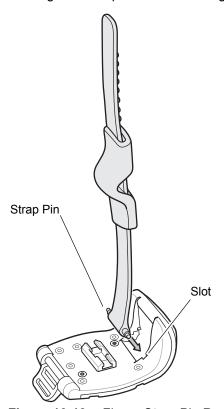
Finger Strap Pin Replacement (Trigger Swivel Assembly)
